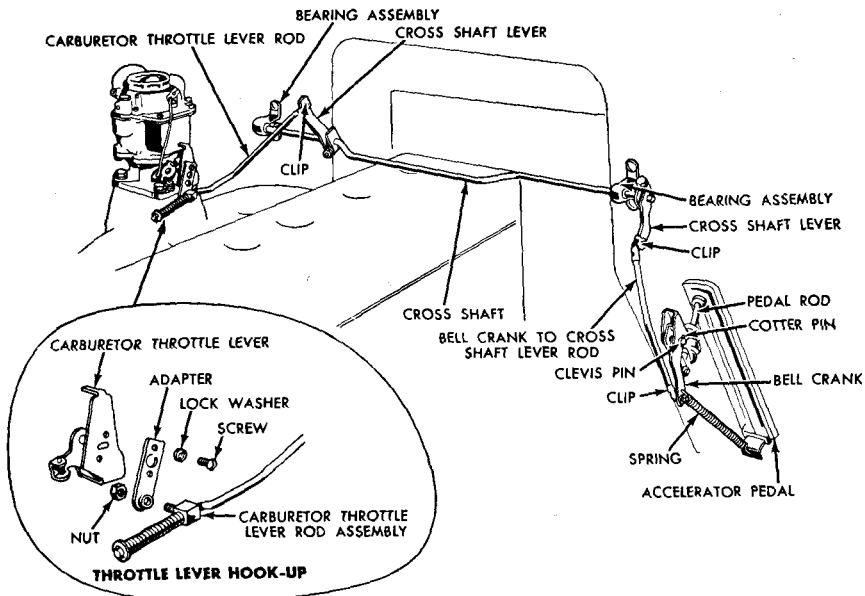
Linkage between accelerator pedal and carburetor throttle valve.
